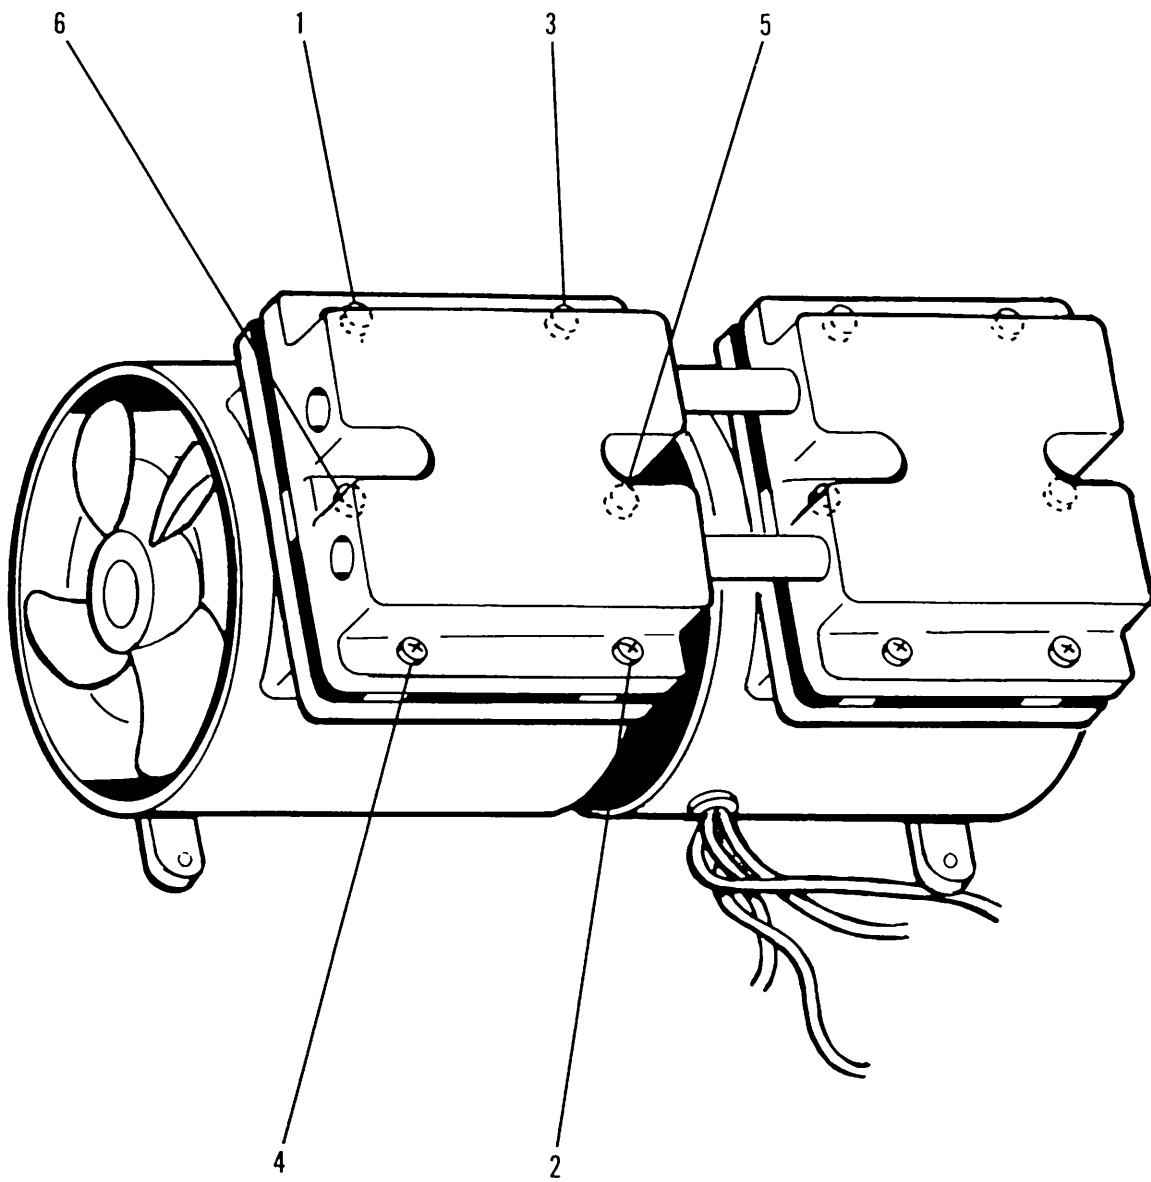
Compressor Cylinder-Head Screw Torque Sequence
